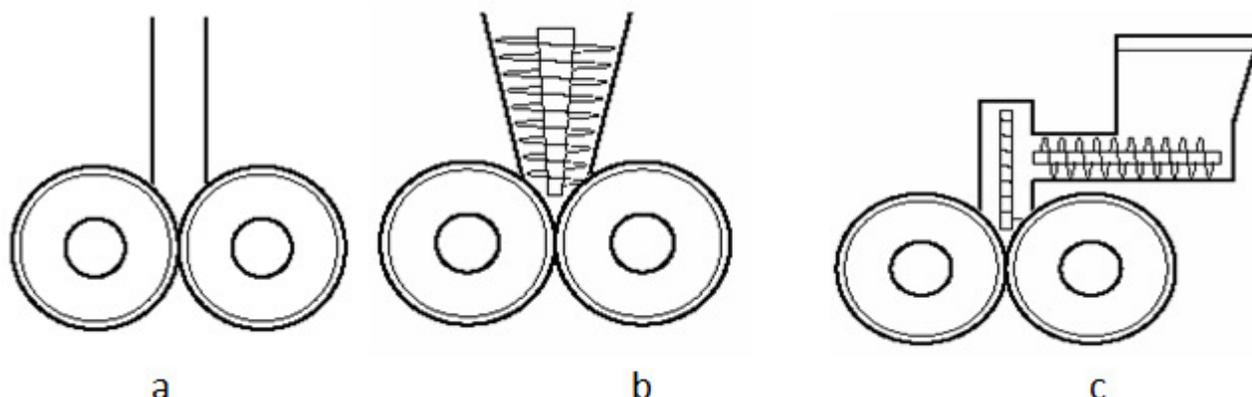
Different feeding system: a) gravity feeder, b) single screw feeder, c) double screw feeder<sup>16</sup>
